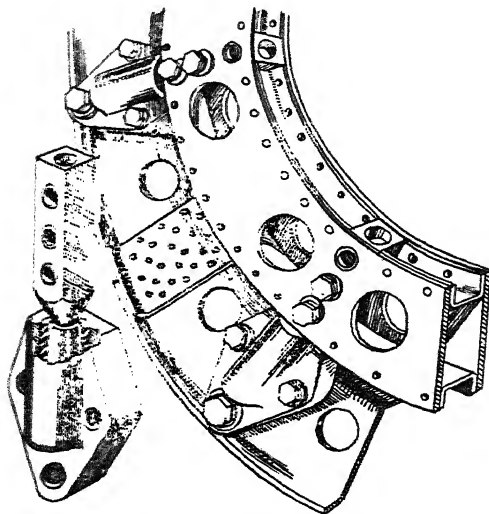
SHORT "VALETTA" ENGINE MOUNTING DETAILS
